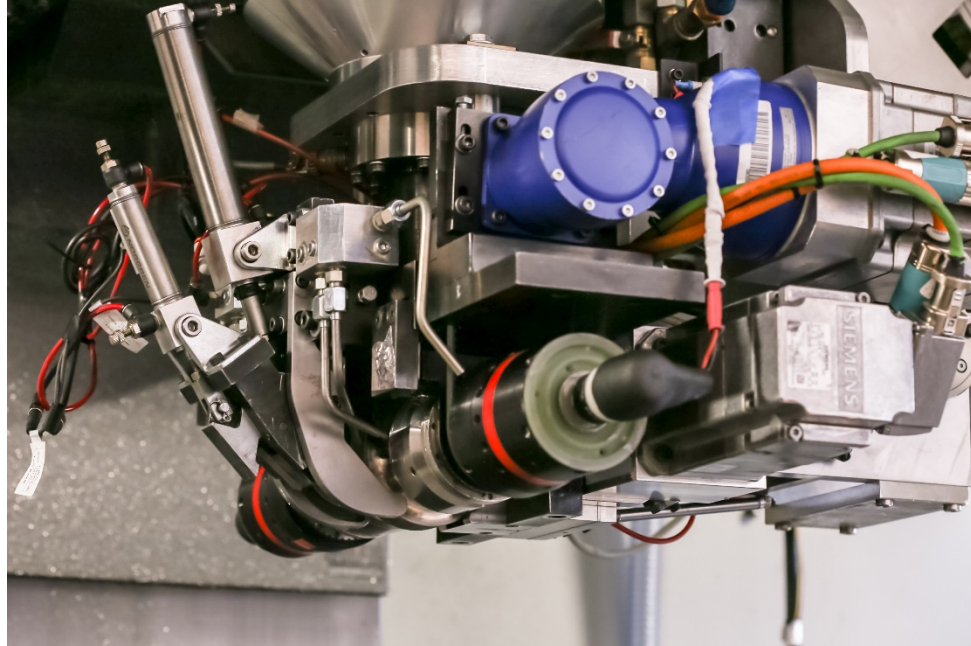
Welding assembly of a 9 kW Fabrisonic SonicLayer 4000 UAM system [33].
